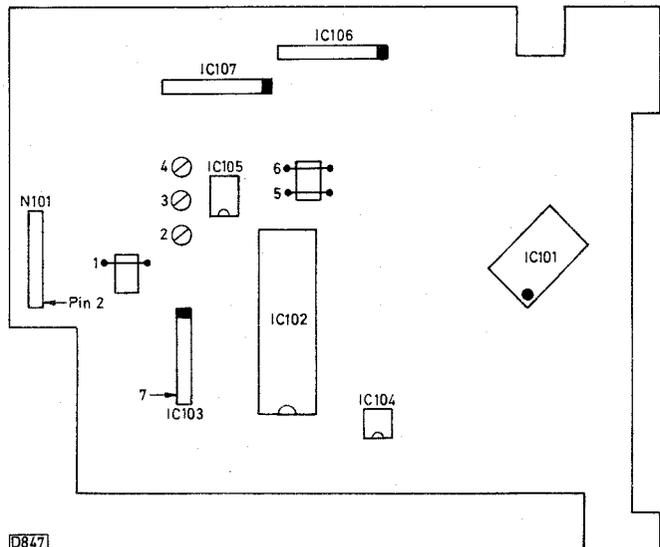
Layout of the servo/microcomputer control board, Hinari Models VXL8/9. 1 TP3 record CTL; 2 head switching-1; 3 head switching-2; 4 preset tracking; 5 TP1 drum flip-flop; 6 TP2 chassis; 7 IC103 pin 7, playback CTL.
